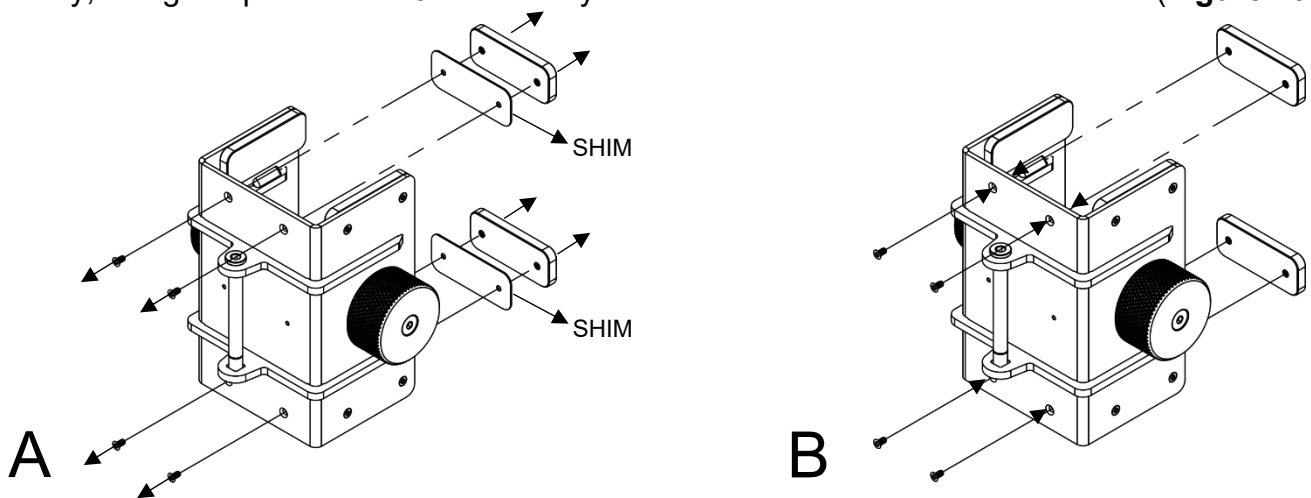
A) Trolley assembly, B) Trolley assembly without stainless steel shims
